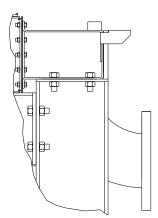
B - SIDE VIEW OF TANK WITH SURGE TANK BRACKET
